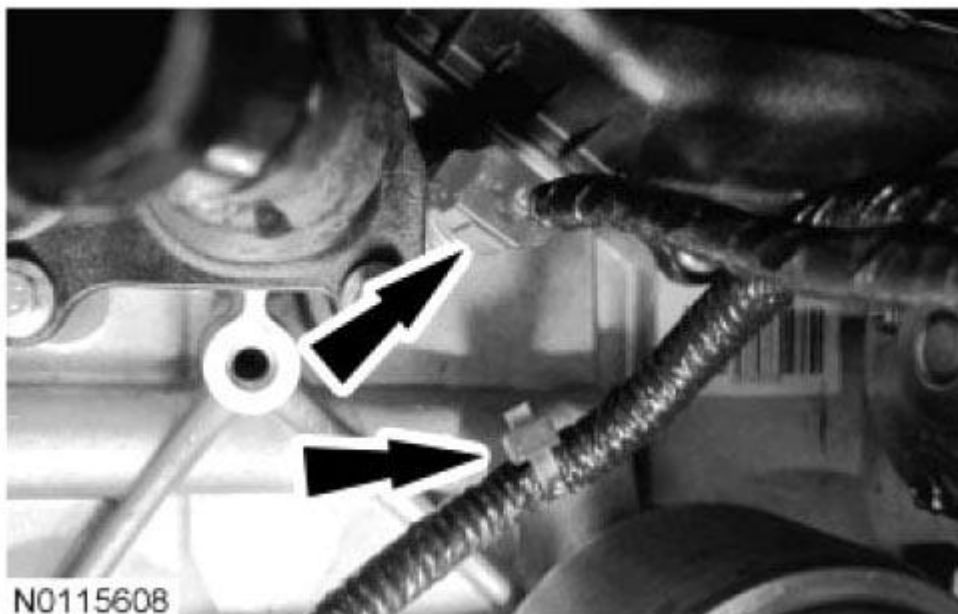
Locating Engine Oil Pressure (EOP) Switch Electrical Connector
